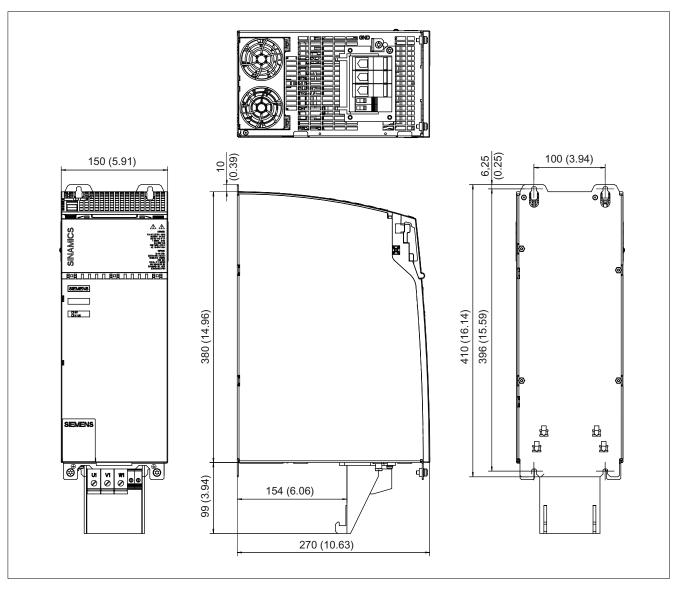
Dimension drawing of 40 kW Basic Line Module with internal air cooling, all dimensions in mm and (inches)
